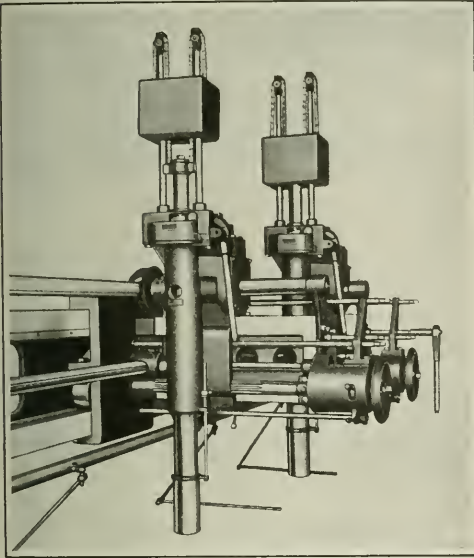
Close-up View of Spindle Heads showing Construction of Mechanism governing In-and-out Movement
